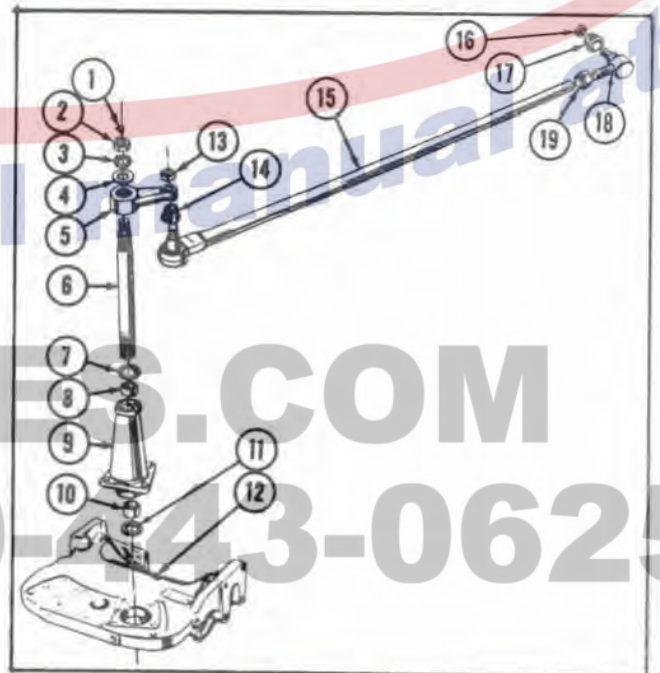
Pedestal and Drag Link Assembly Nomenclature
